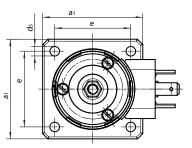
G TC A 040 X20 A02 to G TC A 100 X20 A02 (missing dimensions see fig. 5)
